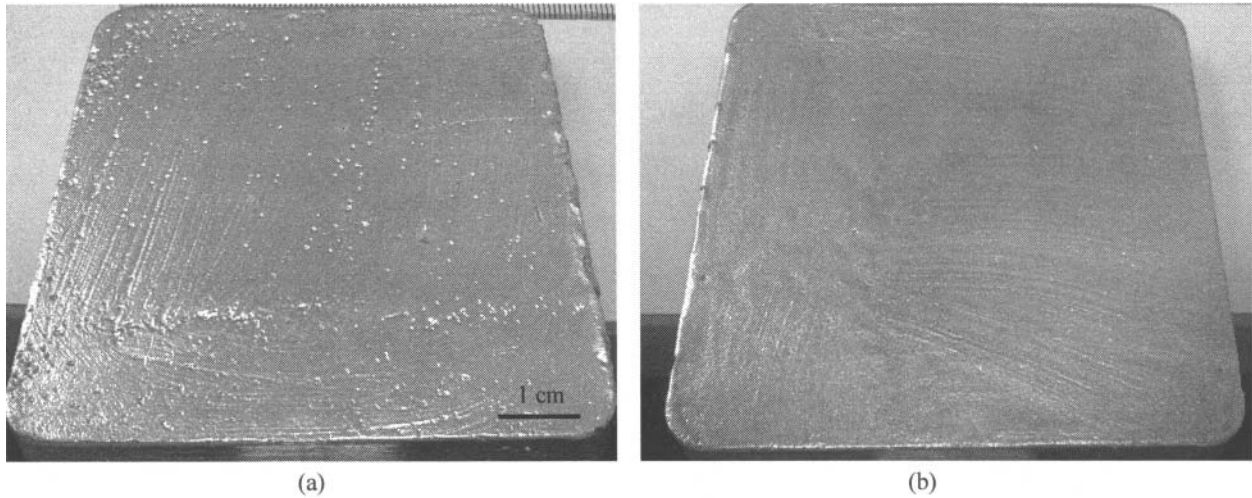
Photographs of the external planar surface of the castings produced with the “elbow shape” mold (see Fig. 3) using (a) the Sr modified alloy and (b) the Sr + CrB modified alloy. A better surface finish and a reduced porosity is clearly obtained using the latter.
